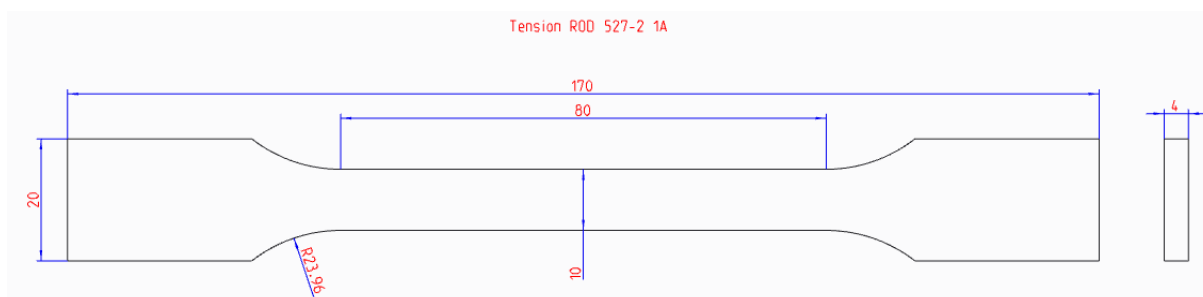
Schematic representation of the tensile rod 527-2 Type A, with dimensions in mm
